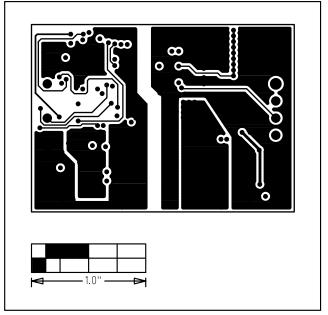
MAX5051 EV Kit PC Board Layout—Inner Layer, V_{CC} Plane
